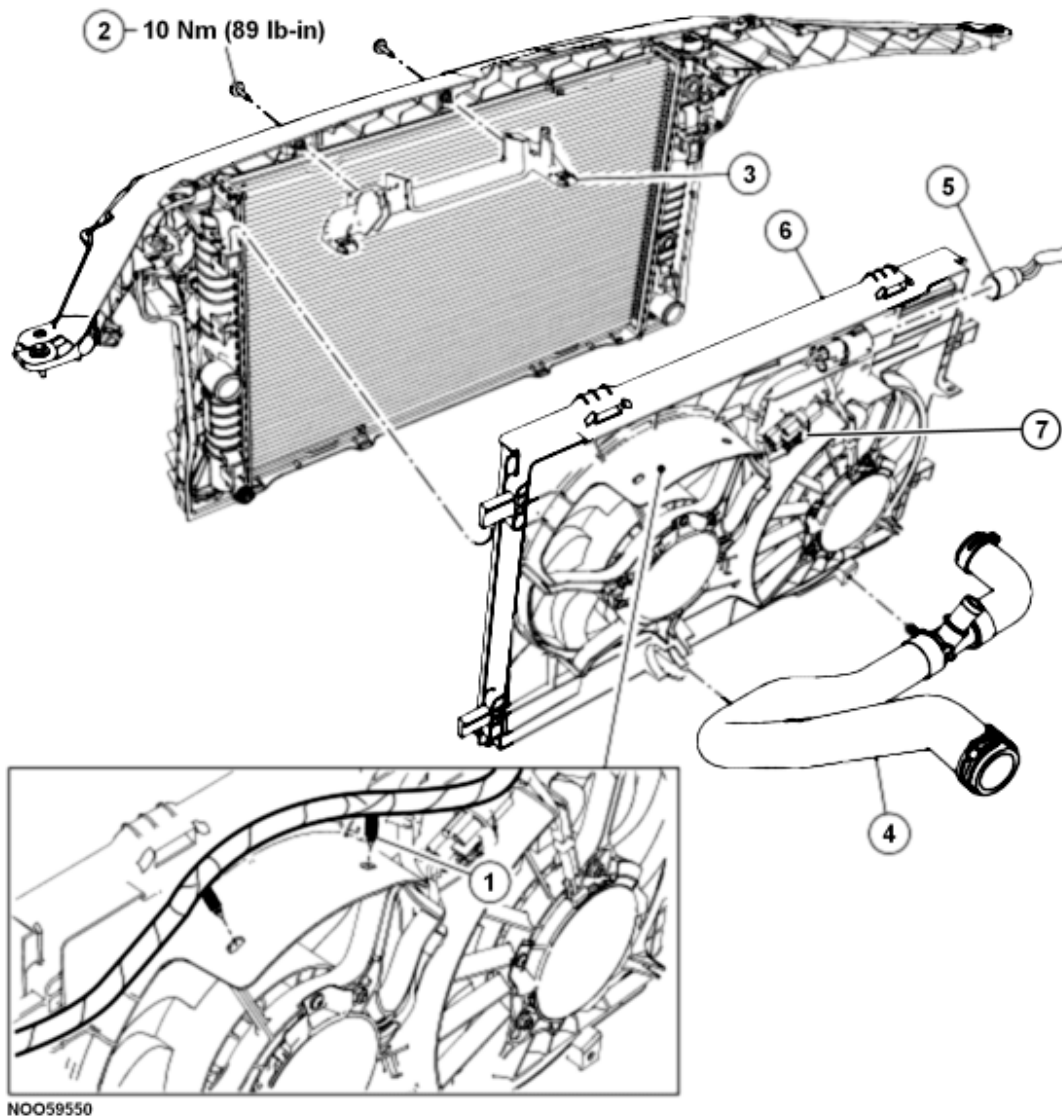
Exploded View Of Cooling Fan Motor & Shroud With Torque Specification - 3.5L Engines
